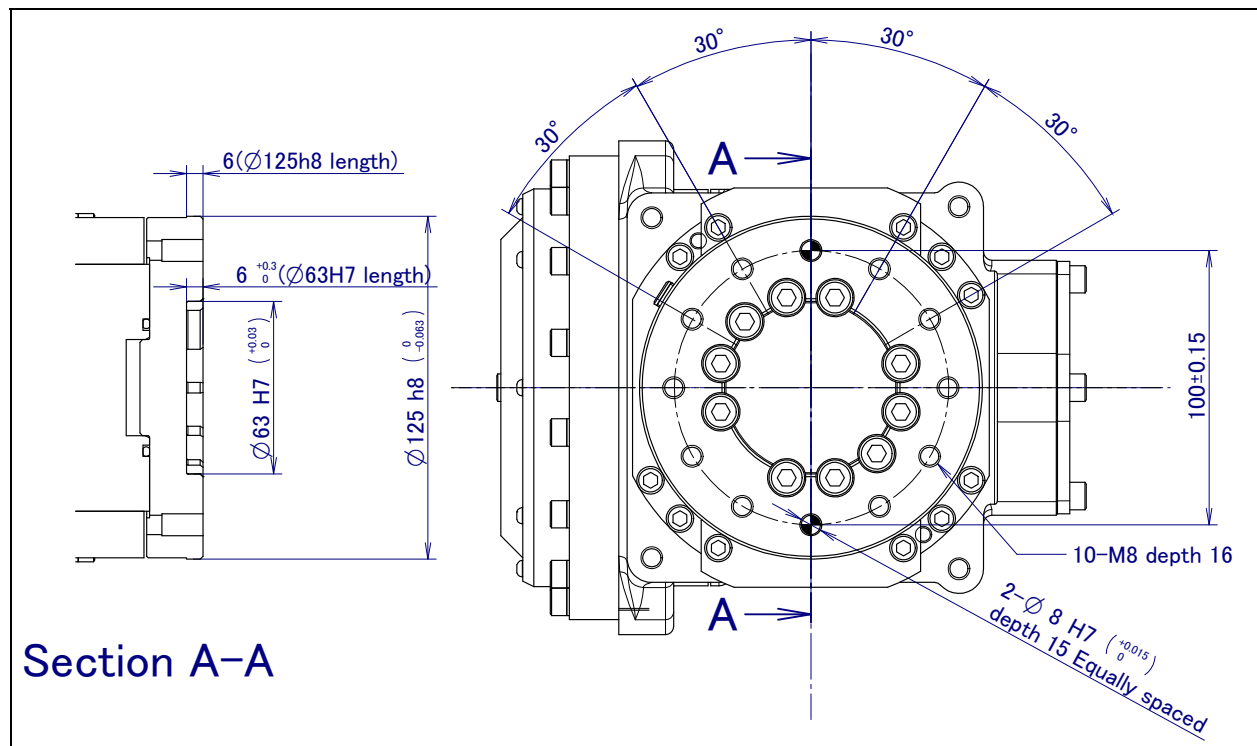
(a) ISO flange, ISO rust protection flange (M-710iC/50/70/50H/50S/45M)
